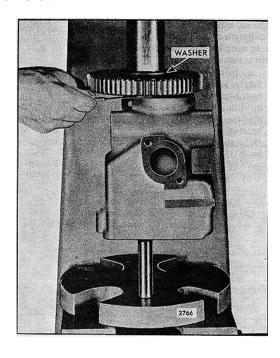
Installing Oil Pump Drive-Driven Gear on Shaft
